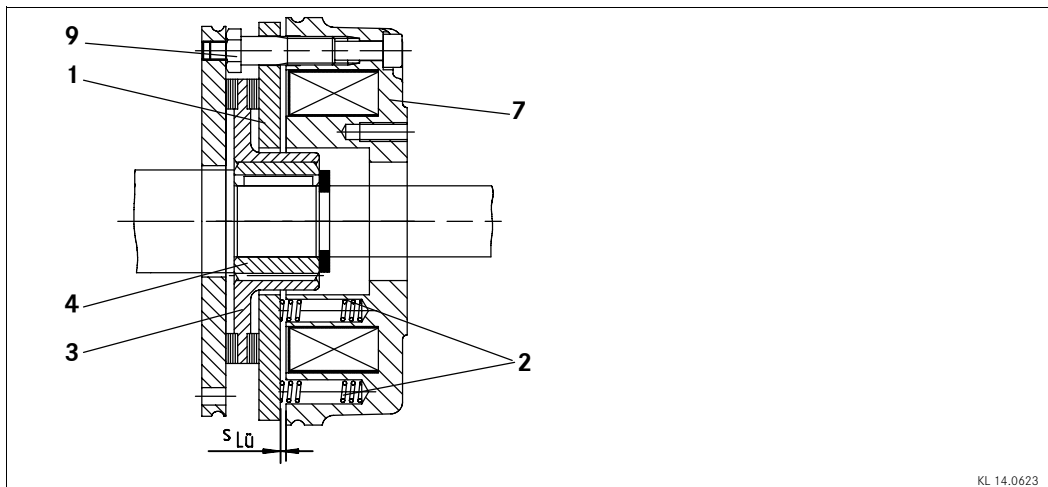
Design of the spring-applied brake INTORQ BFK458: basic module N (complete stator) + rotor + hub + flange
